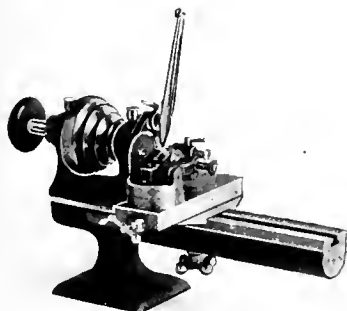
Special Grinding Lathe with Self-contained Measuring Indicator
